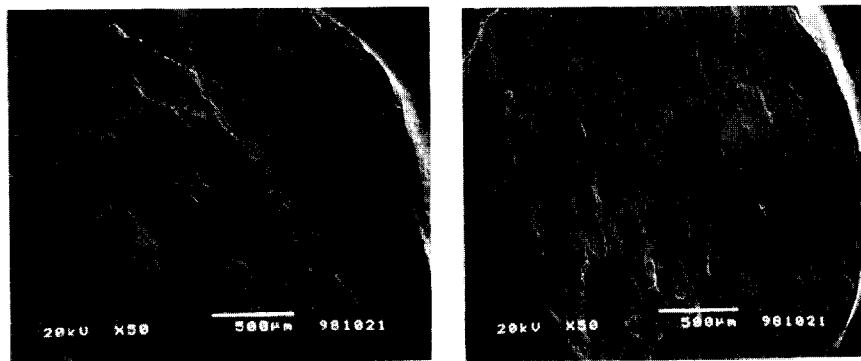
The SEM fracture surfaces of Sn-3.5Ag/lead-frame joints soldered at 150°C for 20 min. and air-cooled. (a) Cu lead-frame, and (b) Alloy42 lead-frame
